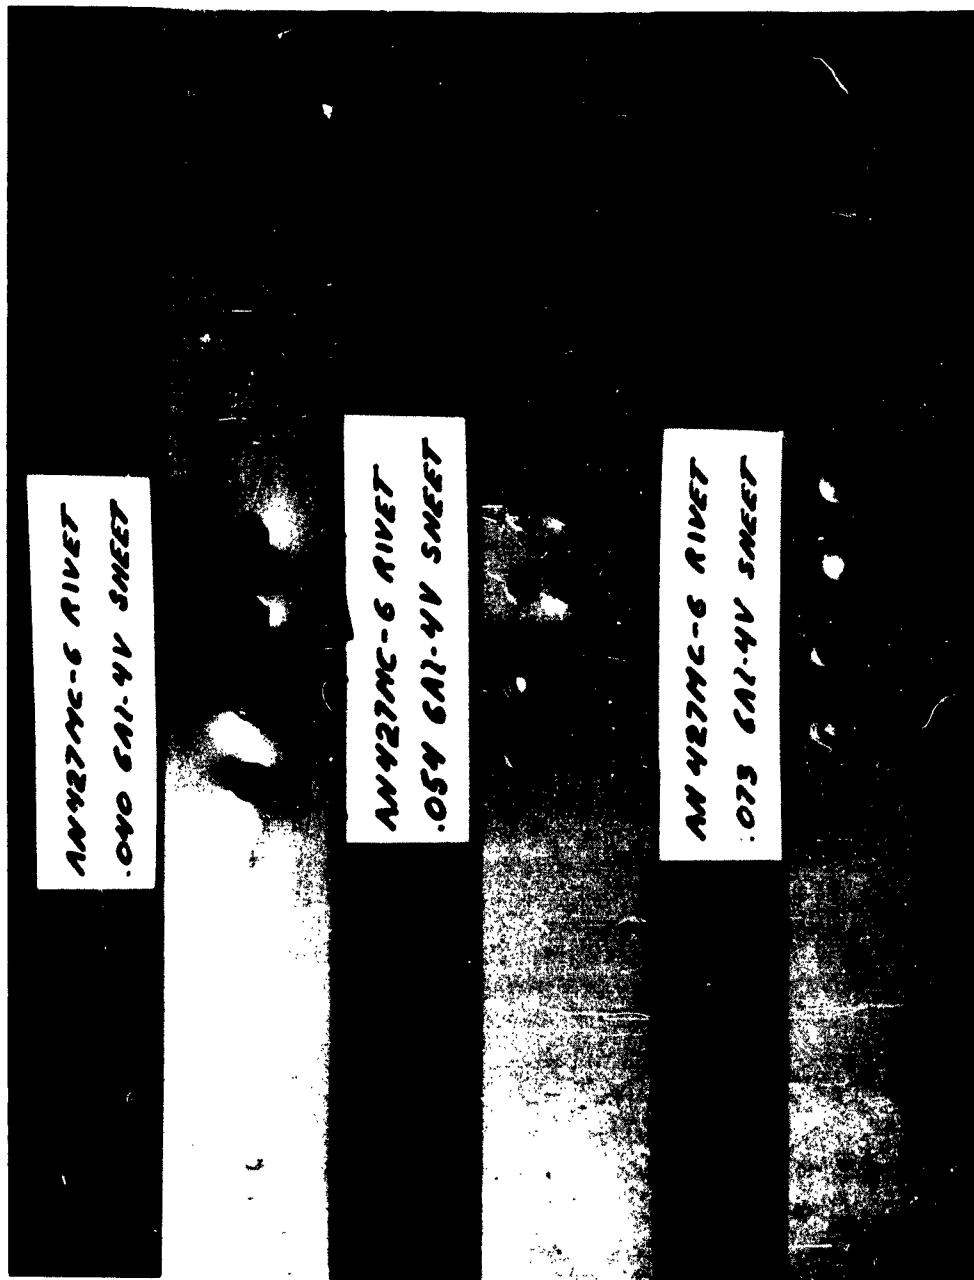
SPECIMEN FAILURE - 3/16 DIA. RIVET
